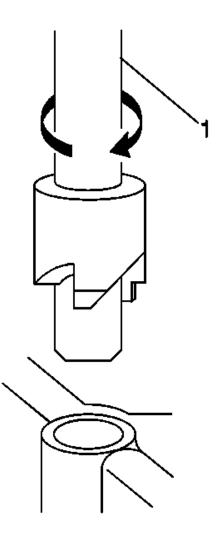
Drilling & Tapping Threads Courtesy of GENERAL MOTORS CORP.
